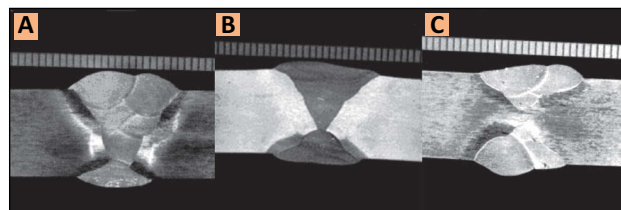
Macrographs of welded plates. Scales are in mm. A — Plate 2A (single-V GMAW weld); B — Plate 2B (single-V GTA weld); C — Plate 2C (double-V GMAW weld).
